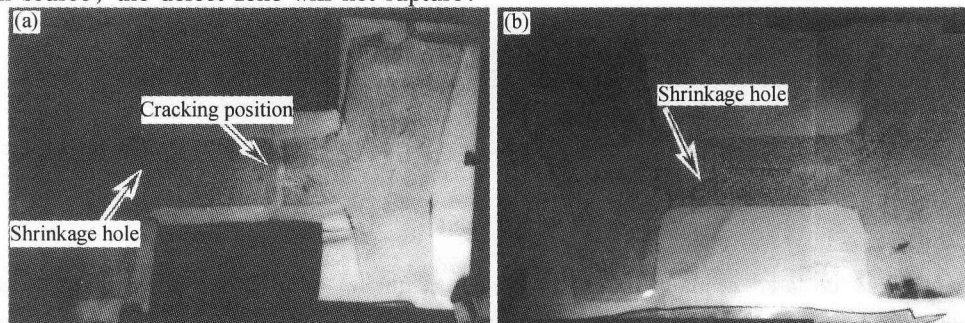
Low magnifying structure in cross section of steel wheel. (a) Cross section with cracking; (b) cross section without cracking.
